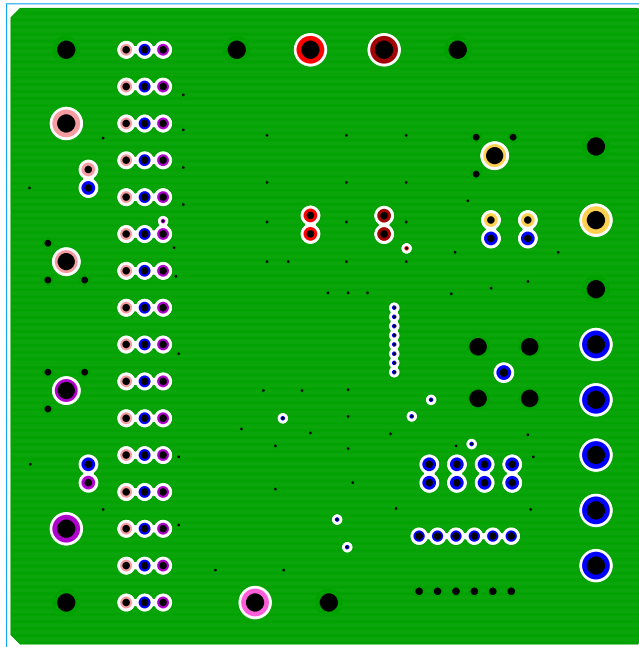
PCB - INNER LAYER 2 (TOP VIEW)
